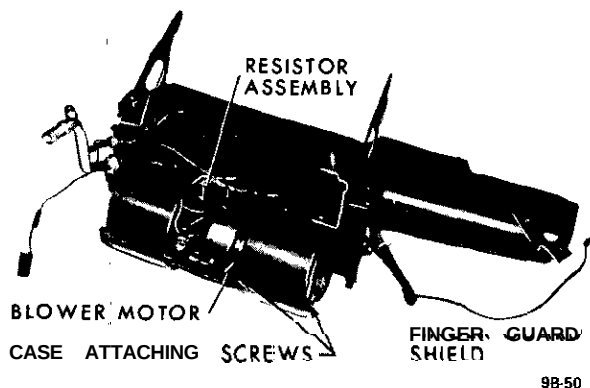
B-69 Assembly Removed • Opel 1900 Manta
